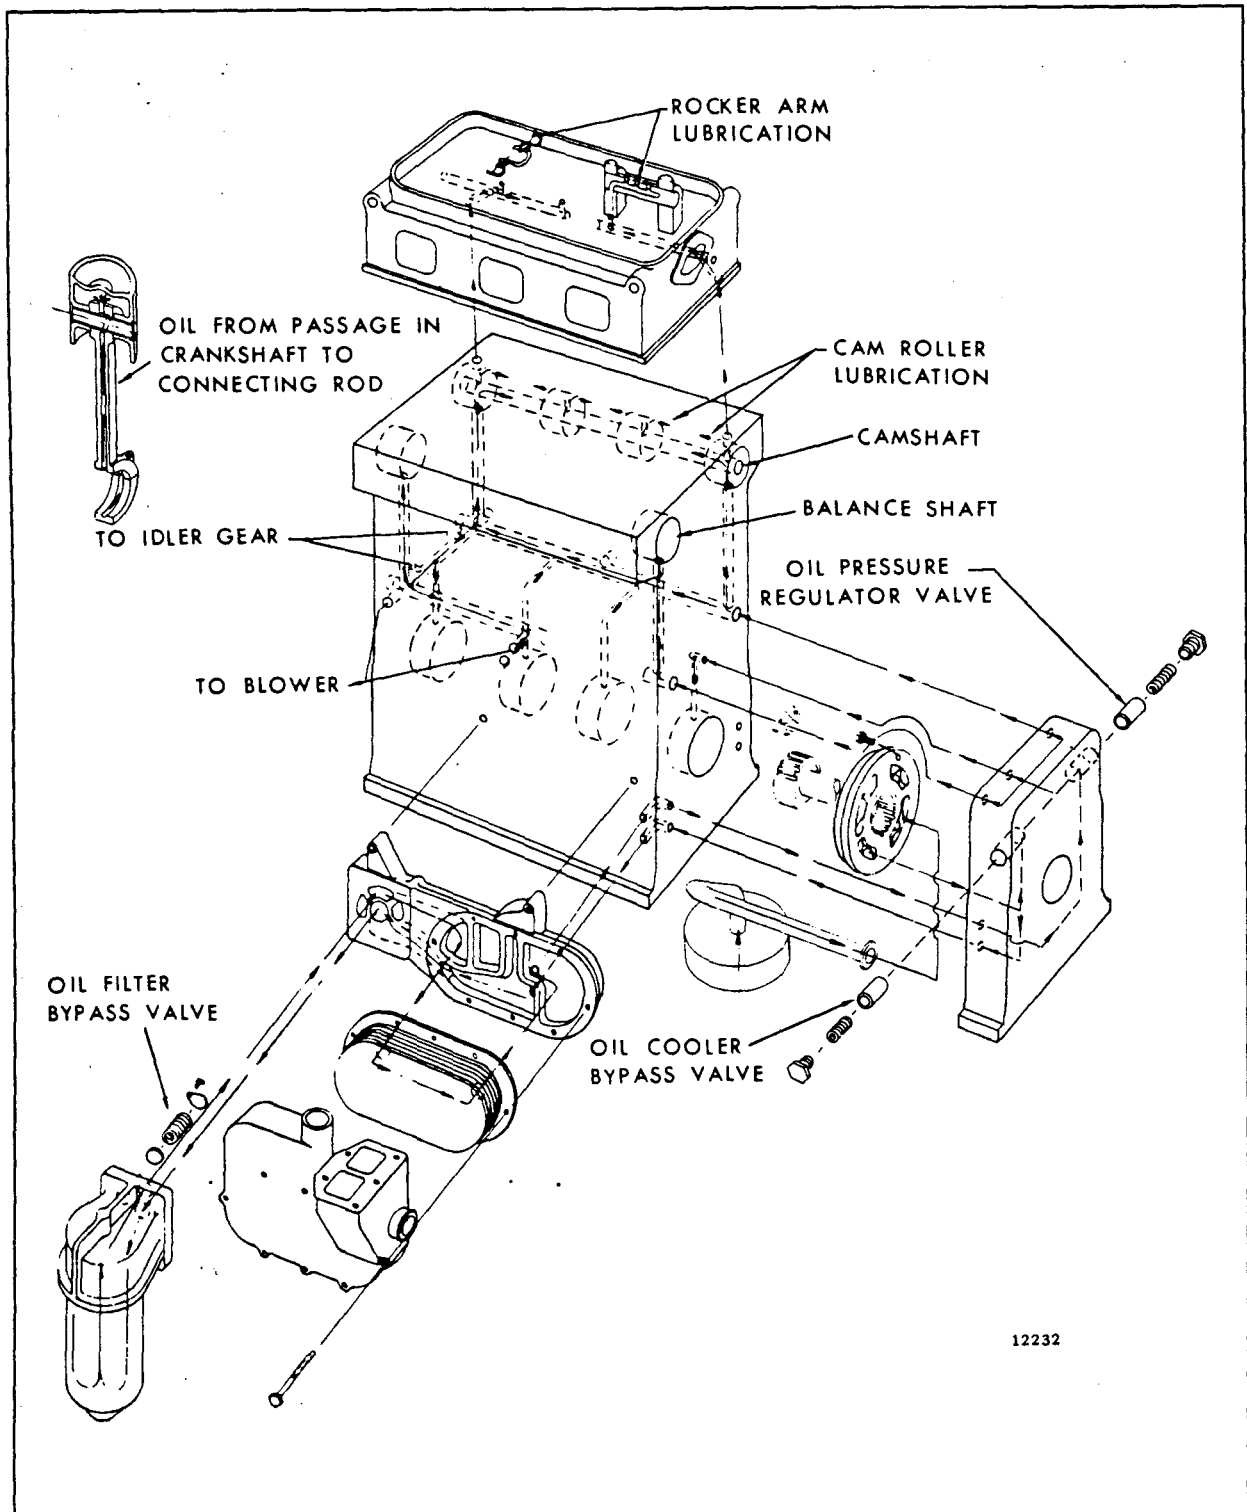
Schematic Diagram of Typical In-Line Engine Lubricating System
